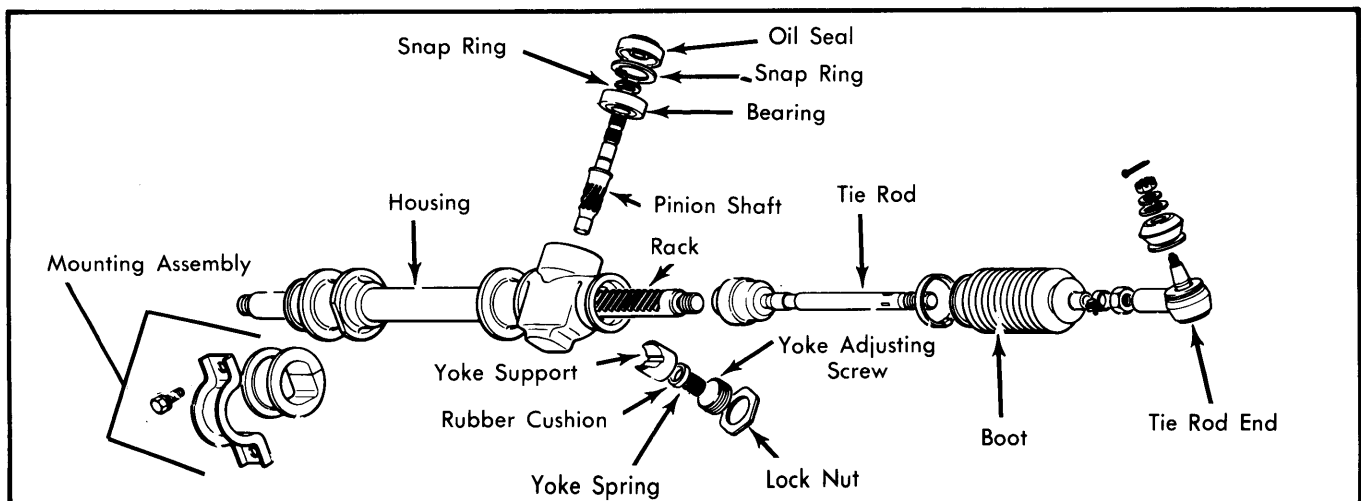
Exploded View of Champ and Colt Hatchback Rack and Pinion Steering
